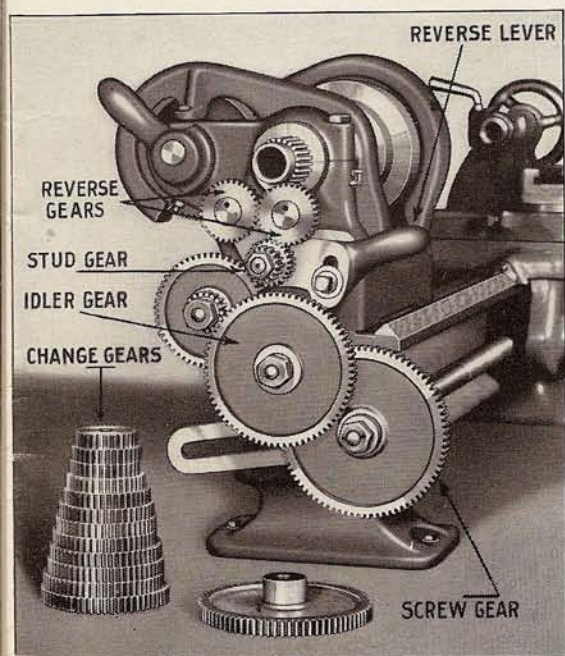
End View of Model C Lathe Showing Change Gear Equipment for Threads and Feeds
